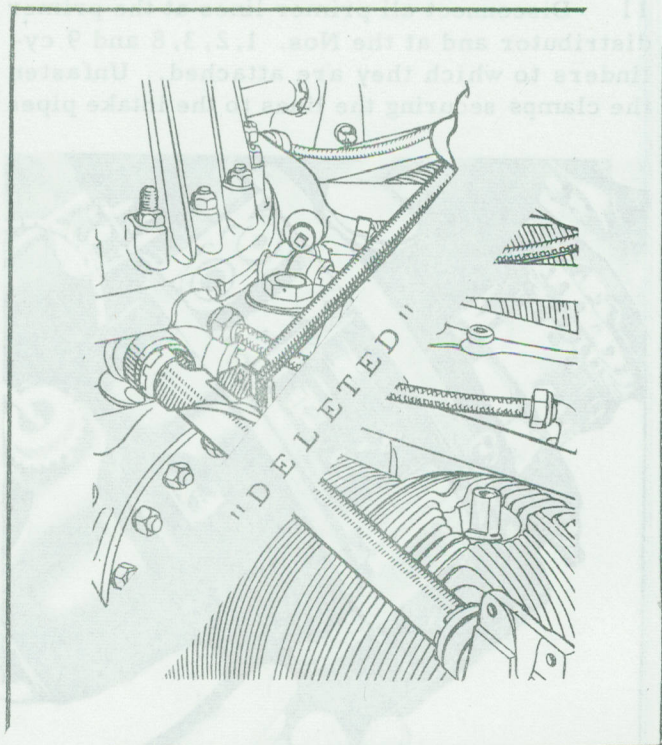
Unfasten Pushrod Cover Nuts - Crankcase End
